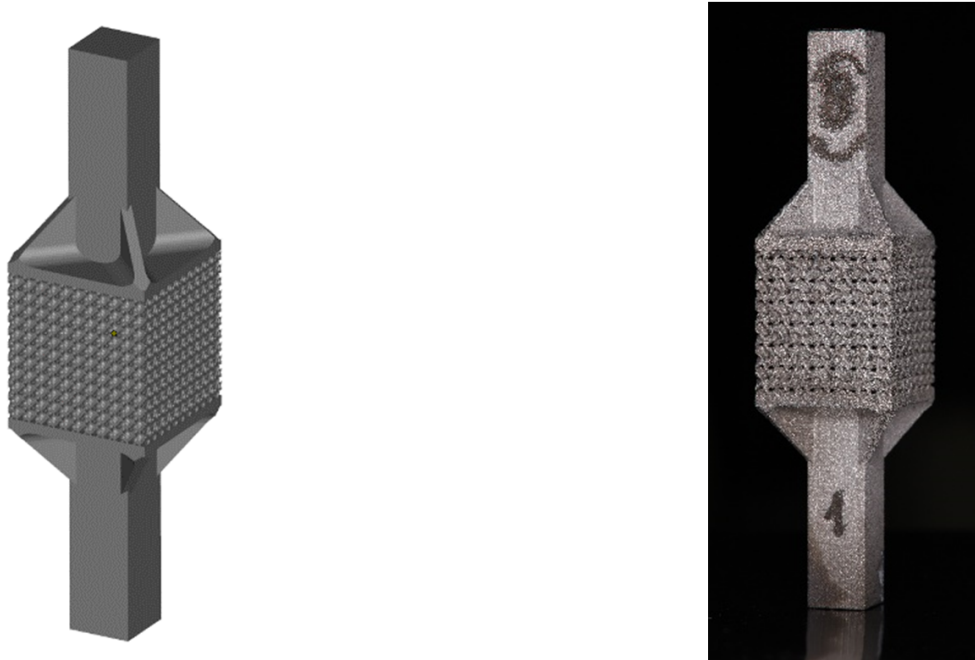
The modified model (left) and 3D-printed specimen (right) for the tensile test. This model solved the problem of tearing at the interfaces (Figure 21) [122].
